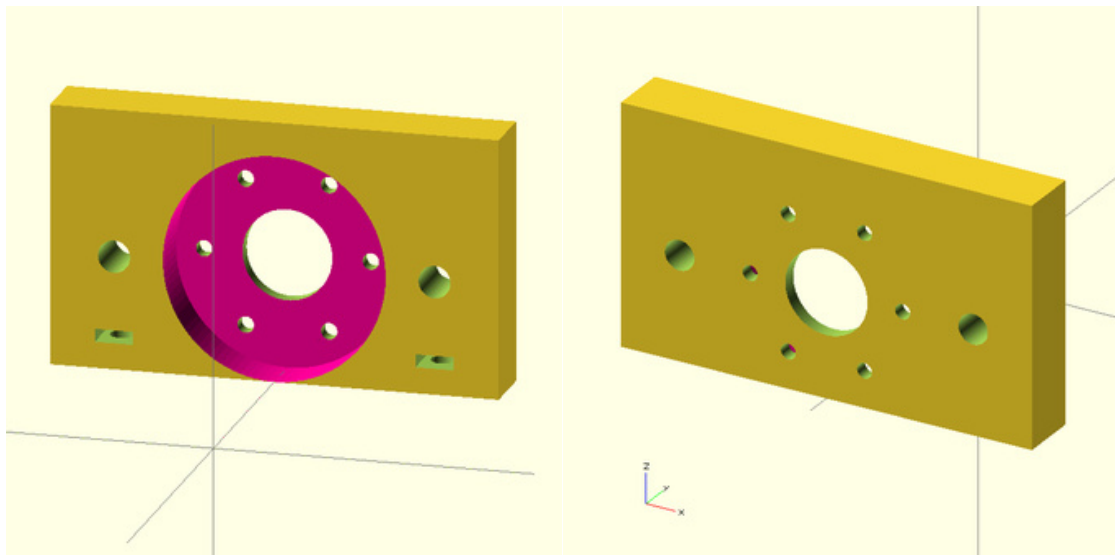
Back view (left) and front view (right) of the motor mounts created in OpenSCAD.
